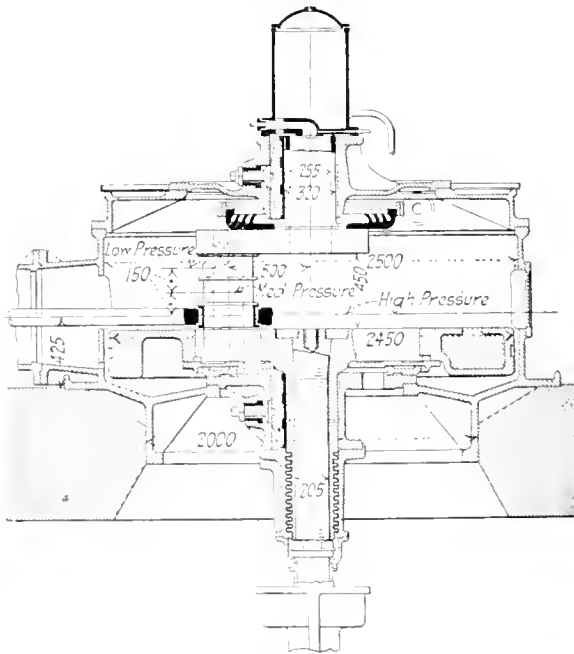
SECTION THROUGH THE BEARINGS OF THE PUMP SHOWN IN FIG. 11
